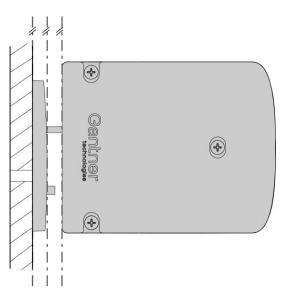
Installation in a locker with glass, right-hinged door (dimensions in mm – inches shown in brackets)
